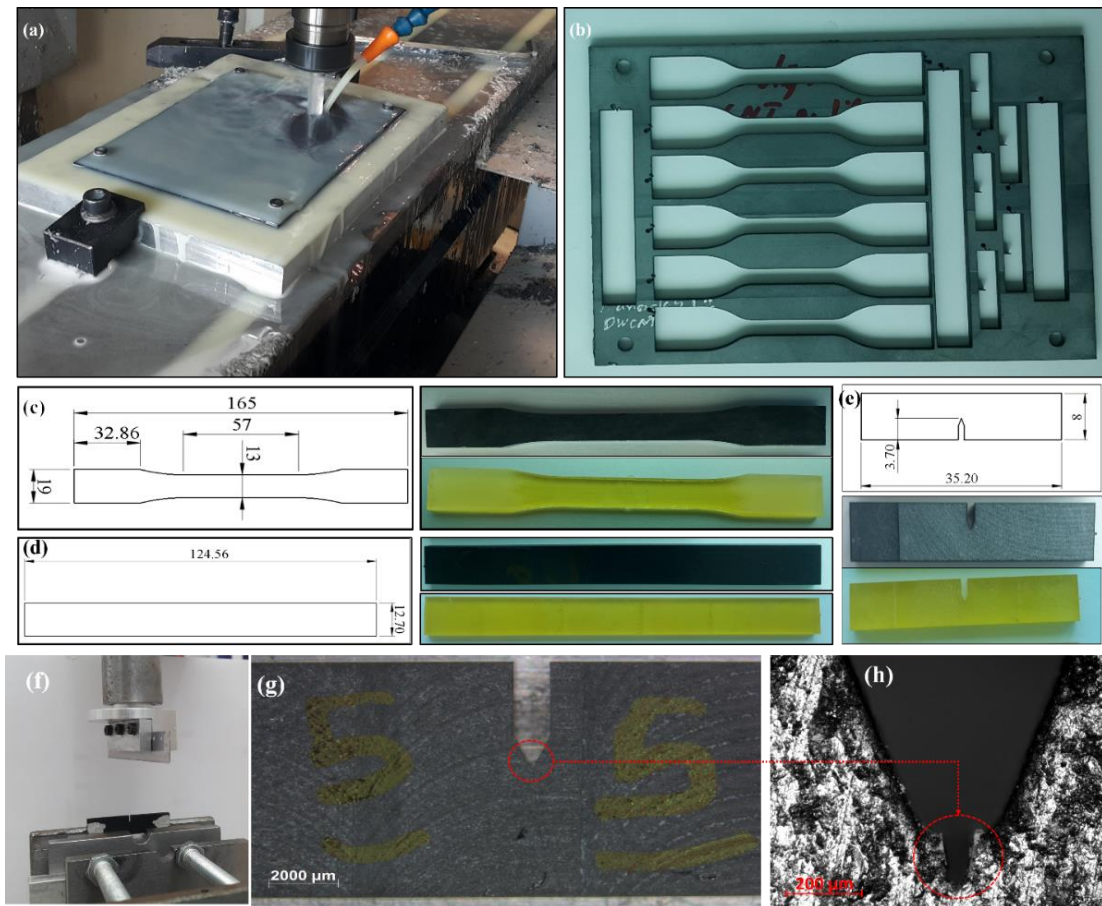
6. (a) Machining top surface of the plates, (b) specimen extraction by waterjet, (c-e)tensile, impact and SENB specimens respectively , (f) machined used for creation of the pre-crack, (g-h) tiny pre-crack made into the notch.
